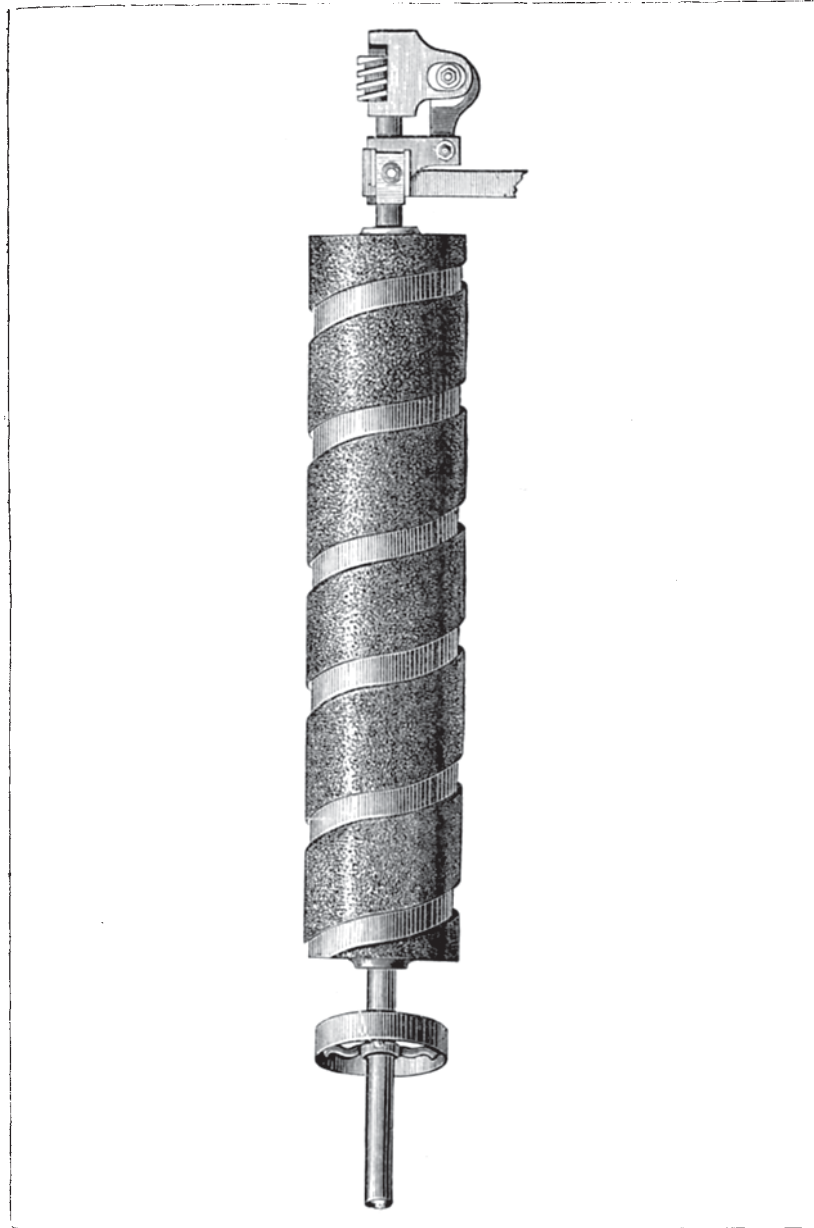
IMPROVED GRINDING ROLLER FOR CARDS.
